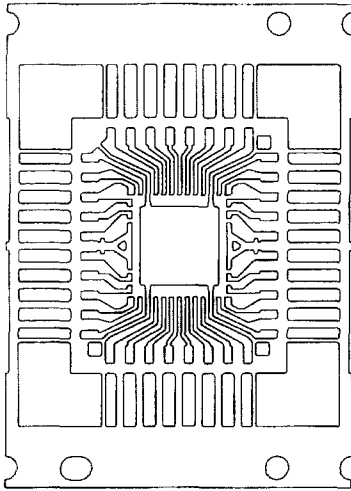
Drawing of a sample blank, 32LD PLCC lead frame
